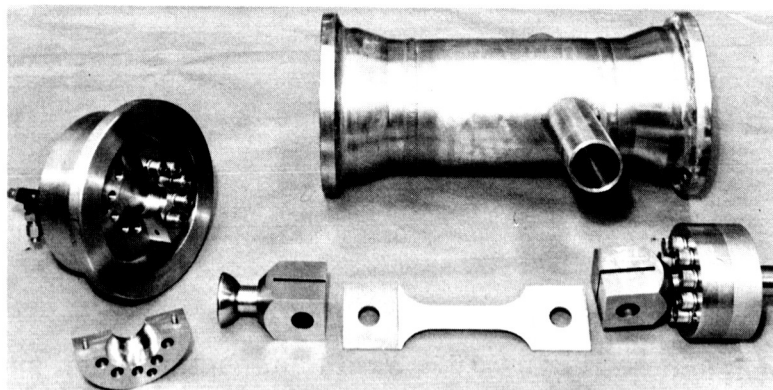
Photograph of cryoformed 301 stainless steel specimen and gaseous hydrogen test chamber.
